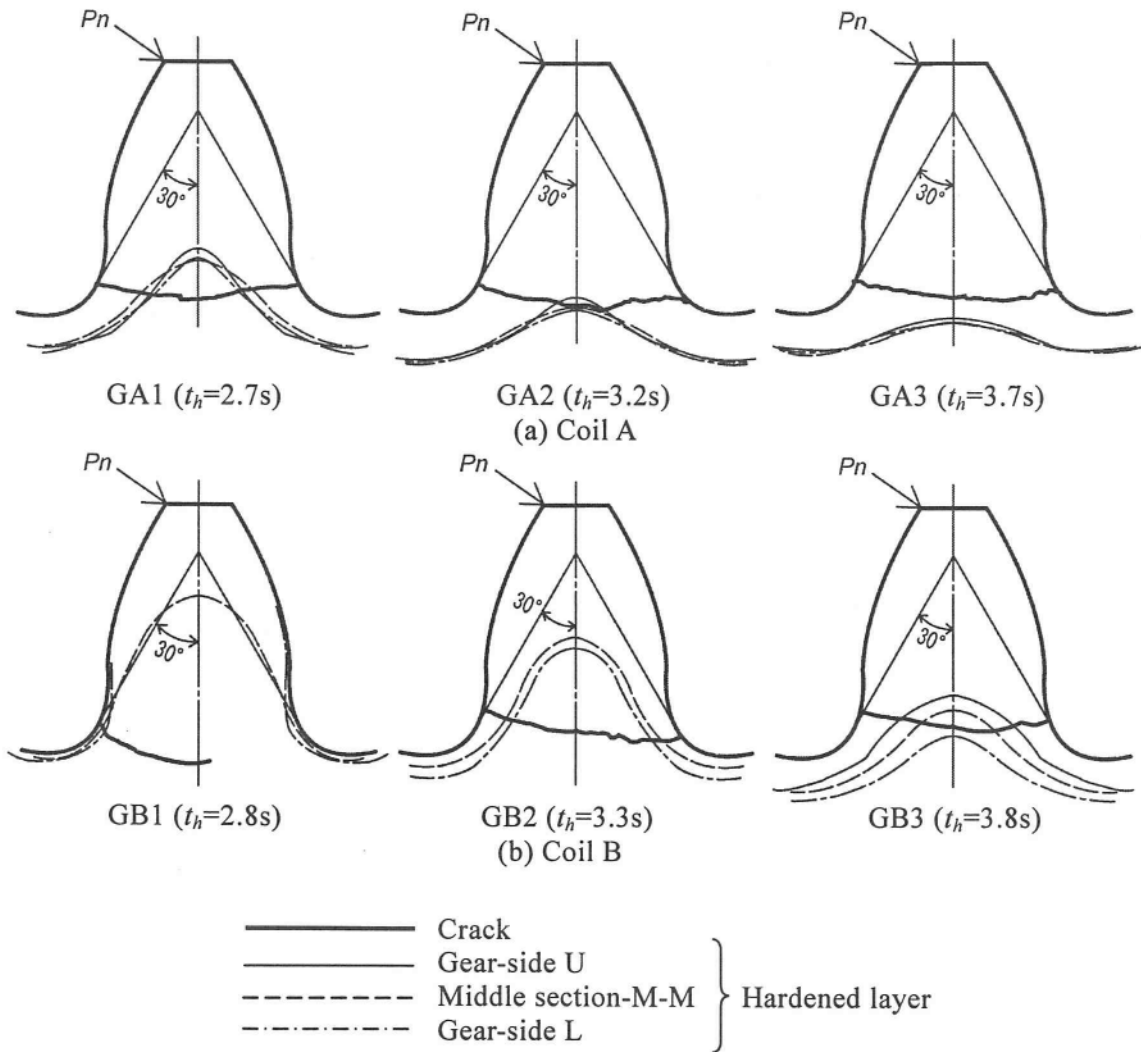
Hardened layer and fatigue crack of test gears
